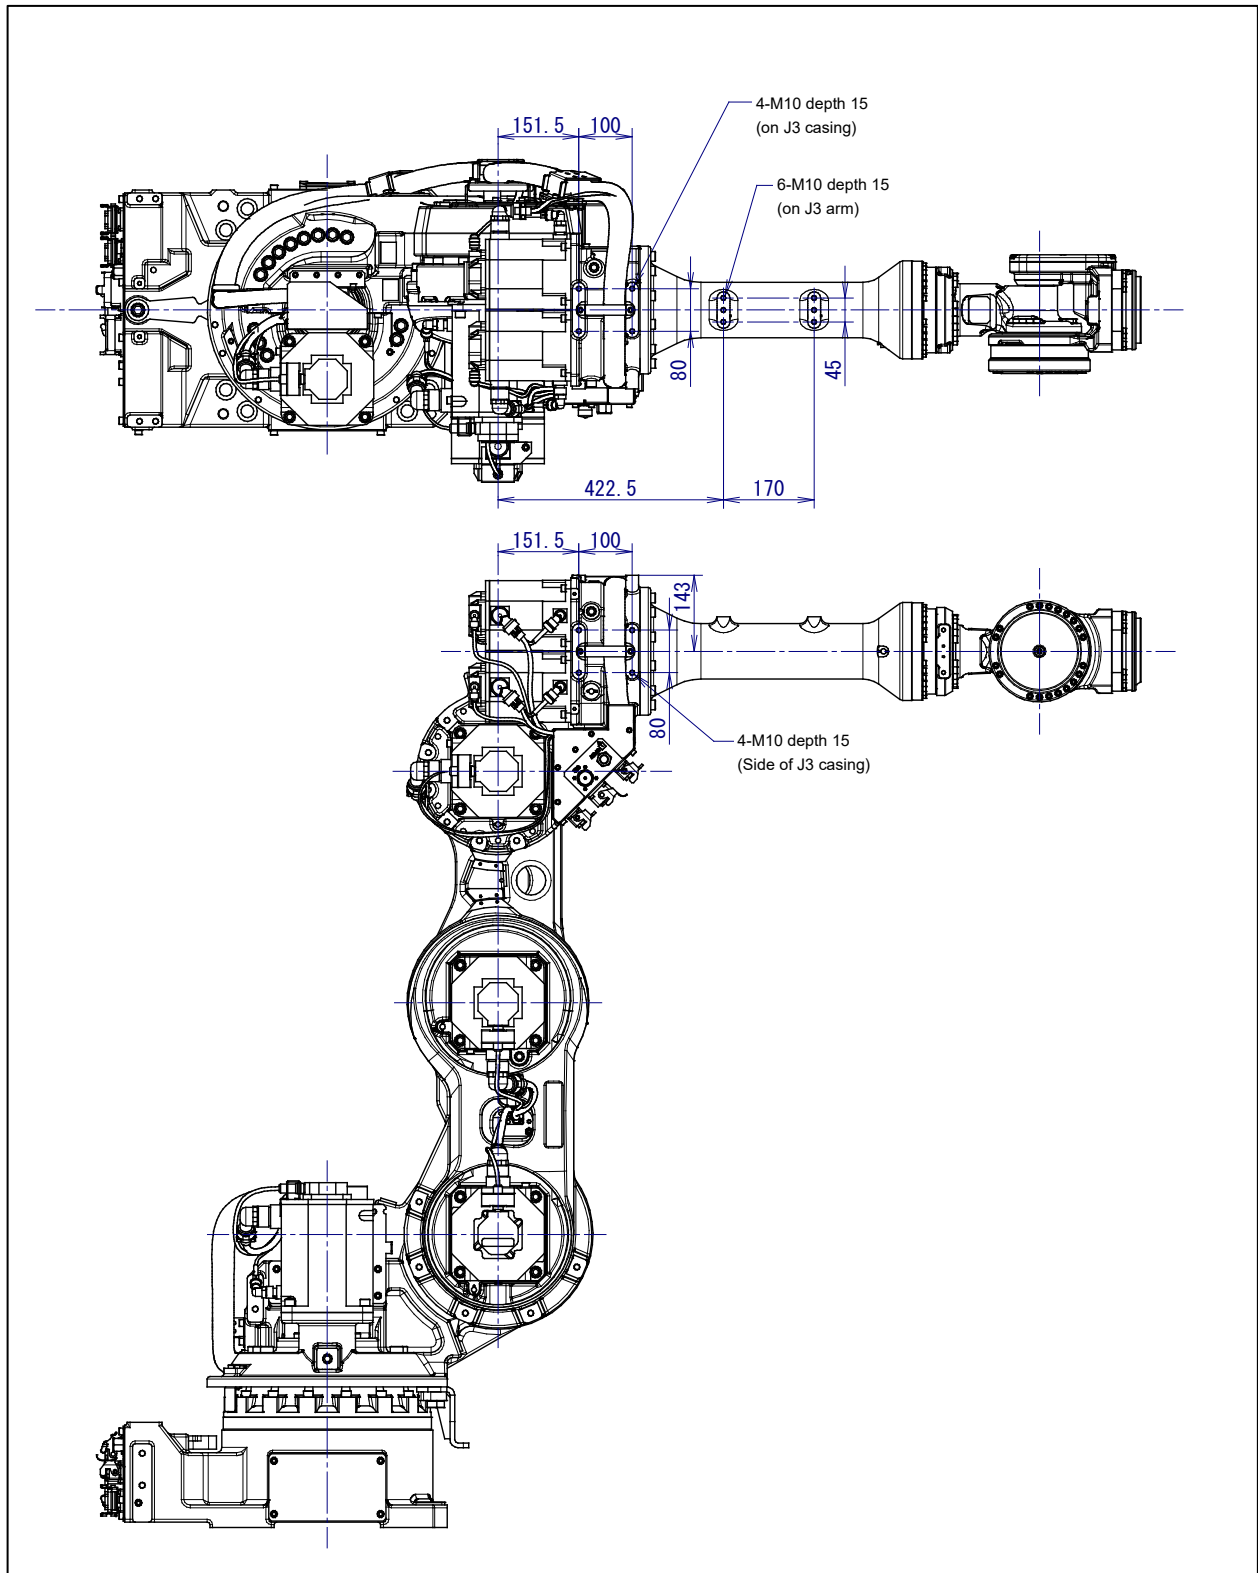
(b) Equipment mounting faces (R-1000iA/120F-7B)
